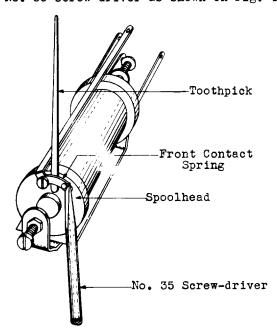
Method of Adjusting for Front Contact Spring Position
